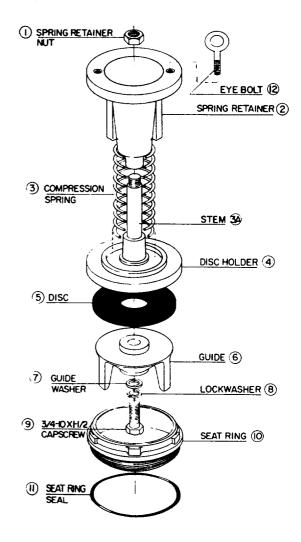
CHECK VALVE ASSEMBLY 8" - 10" HERSEY NO. 2
